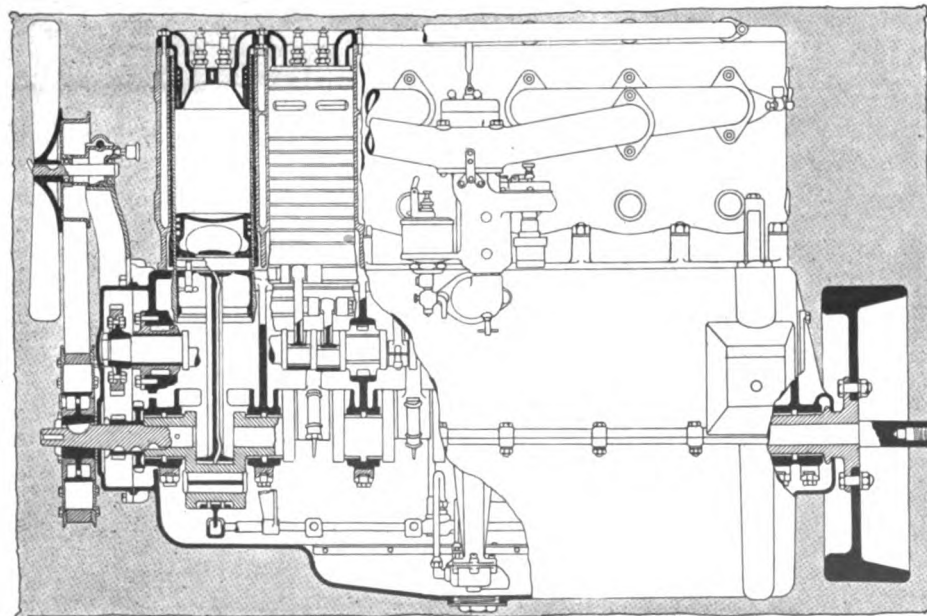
Partial section of the six-cylinder Stoddard-Knight motor
